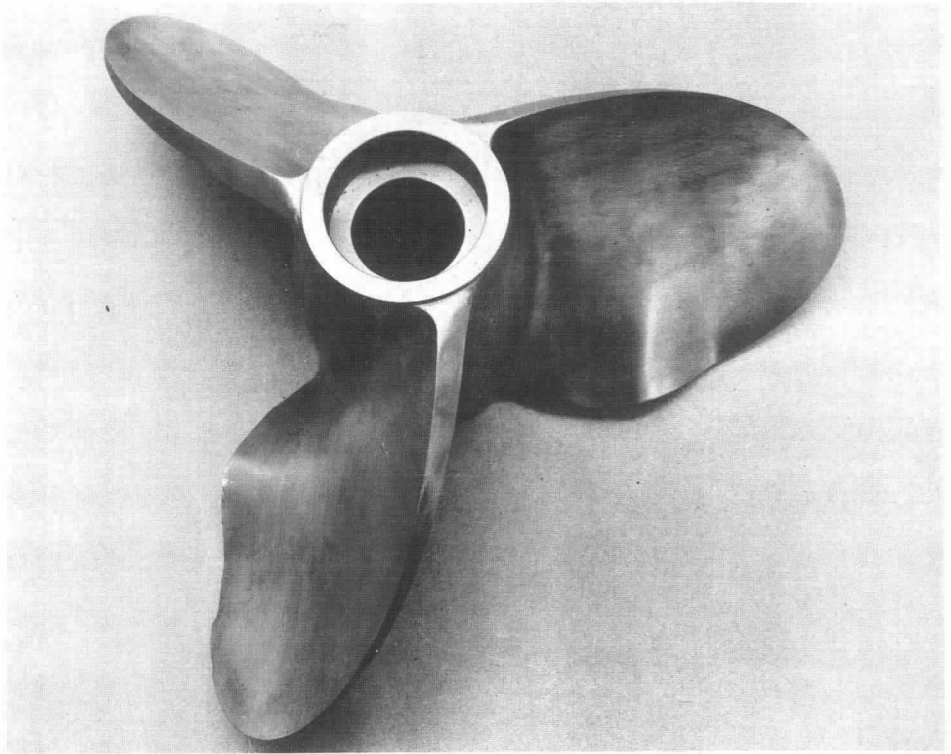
Propeller of theoretical cavity shape, without modified thickness, showing wake failure
